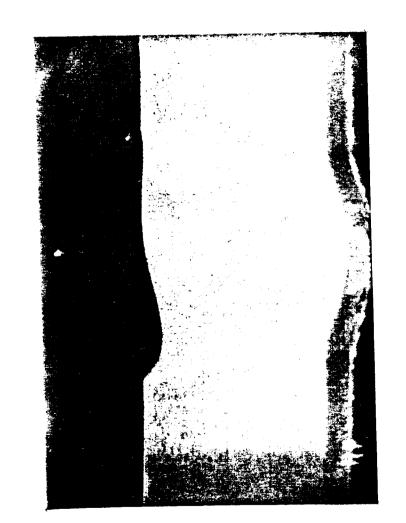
B Weld made with 650ppm nitrogen in shield. Cover. Back.
